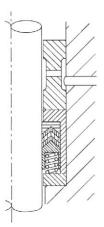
Cartridge mounted spring-loaded chevron packing
